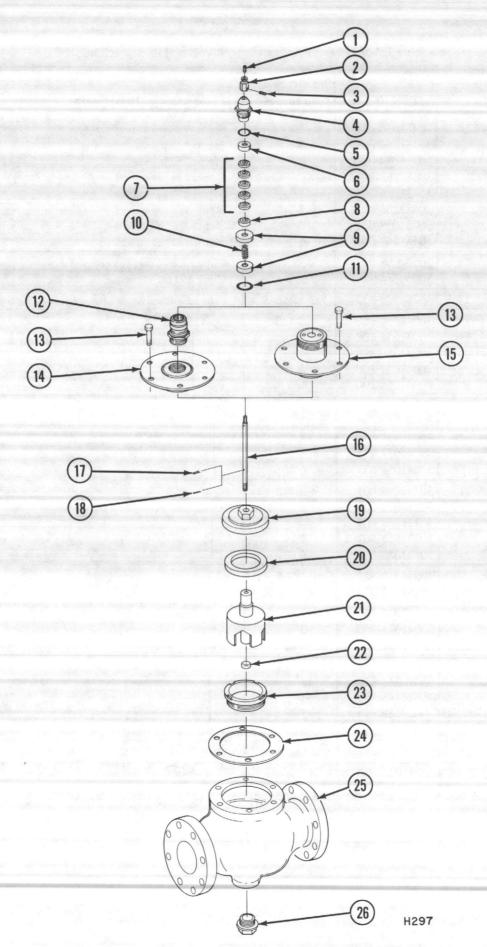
V5011 Direct Acting Flanged Valves Exploded View.
